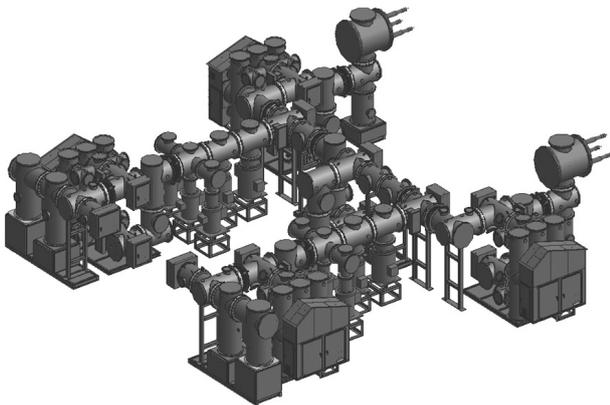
Outline Drawing of the 204kV GIS Configuration
